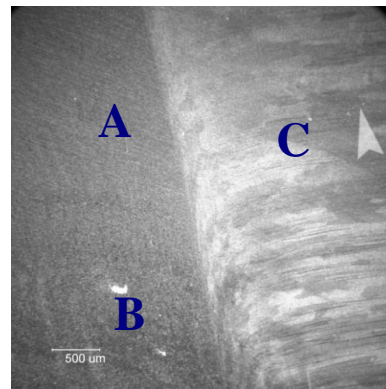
Transition inside of weld nugget and TMAZ.
